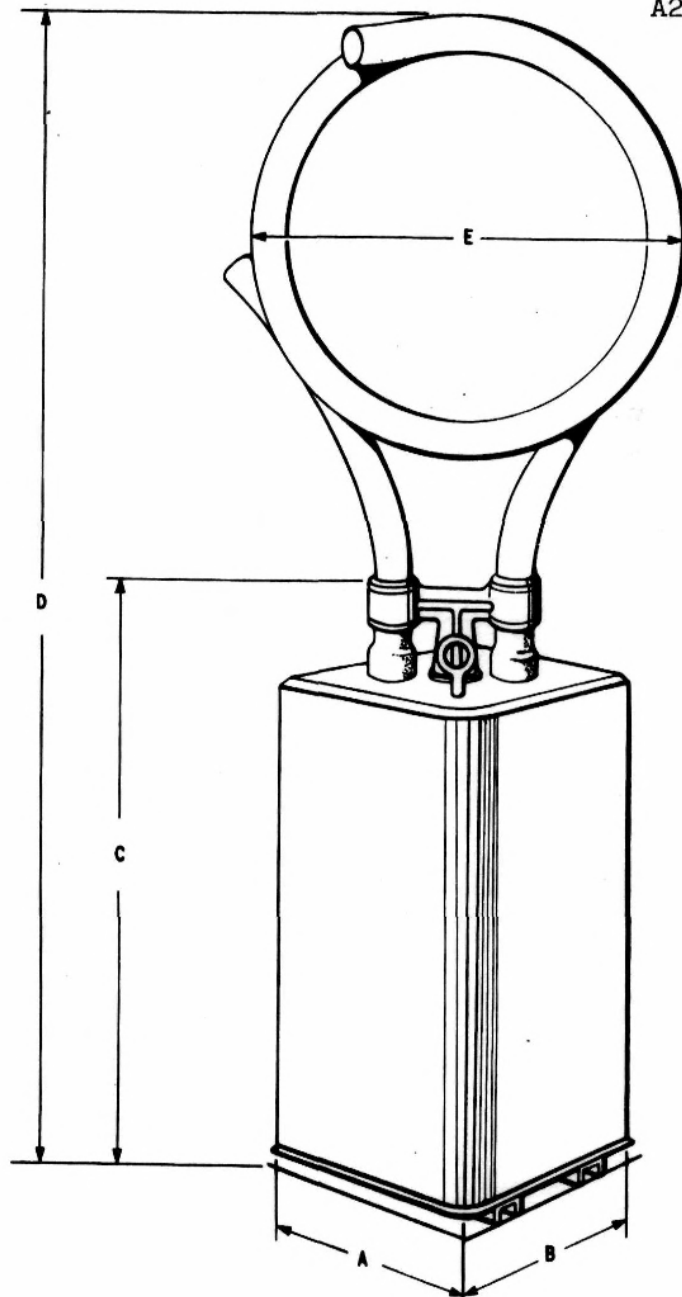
MANHOLE & POLEMOUNTED TYPE LOADING COIL CASE WITH DOUBLE STUB CABLES.
